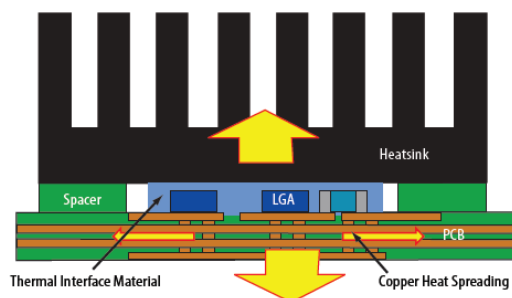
Heat sink assembling for LGA package GaN FET. Image source: www.epc-co.com
